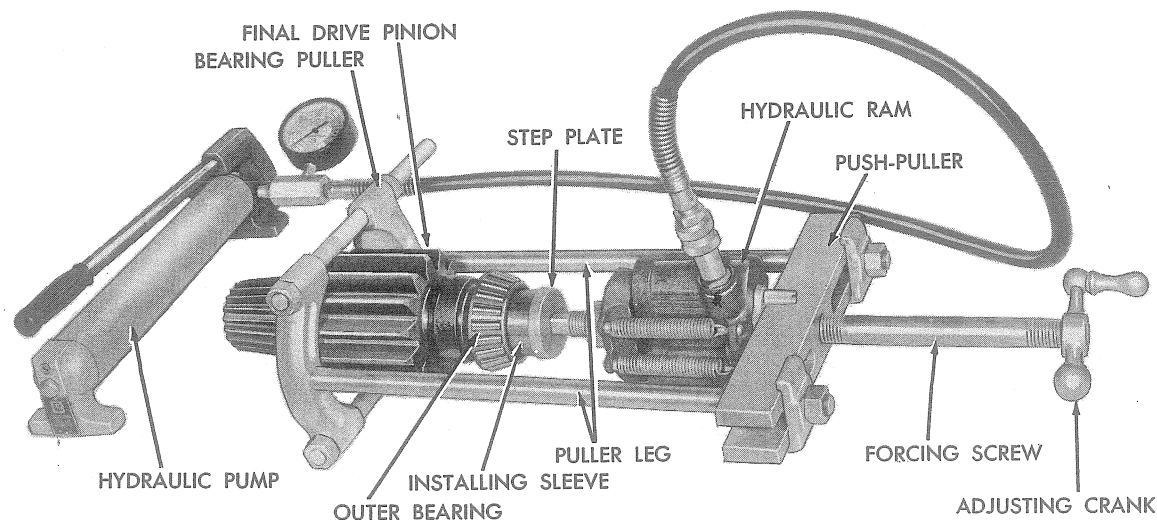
Pulling Outer Bearing from Final Drive Pinion
